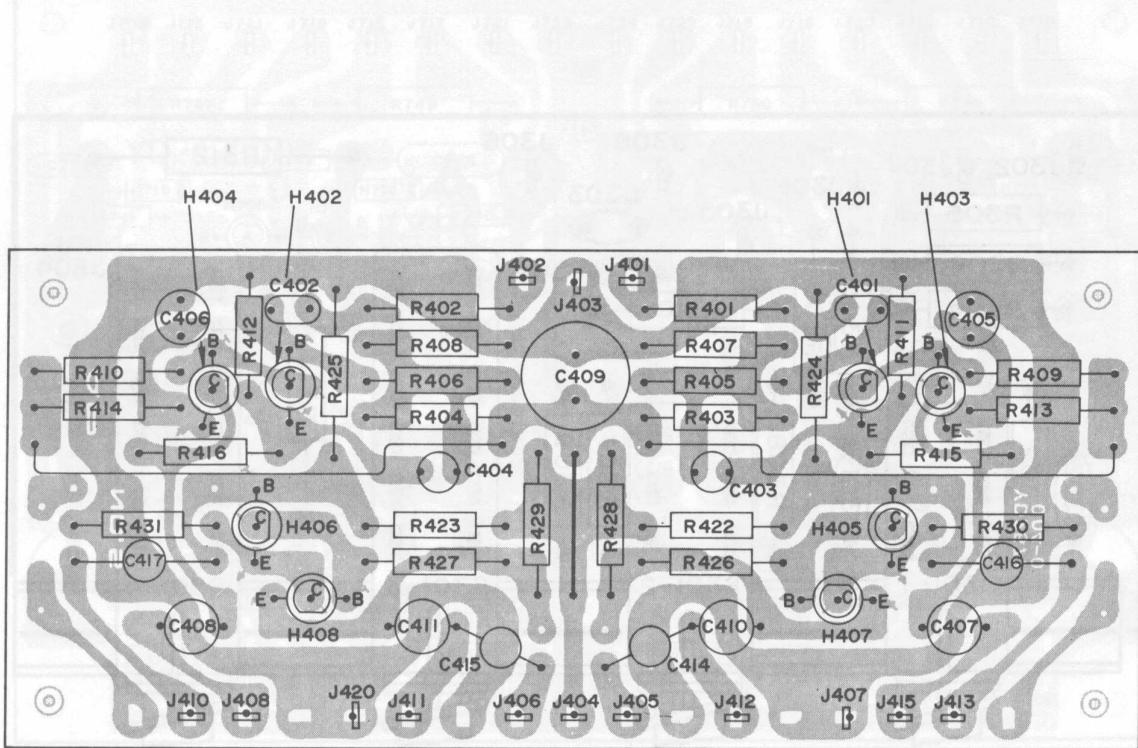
Tone and Pre-Amplifier Assembly P400 Component Locations
